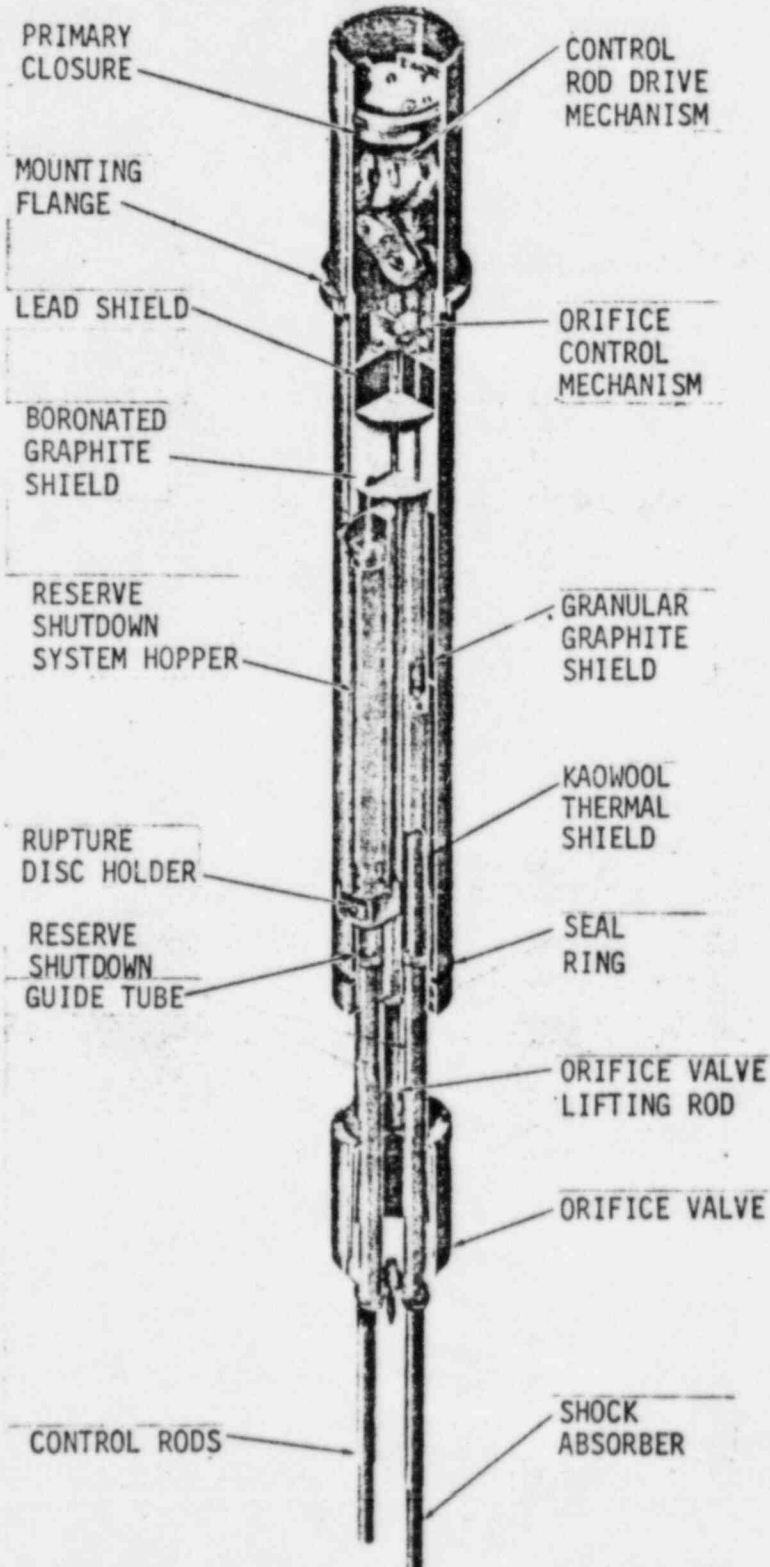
CONTROL AND ORIFICING ASSEMBLY
